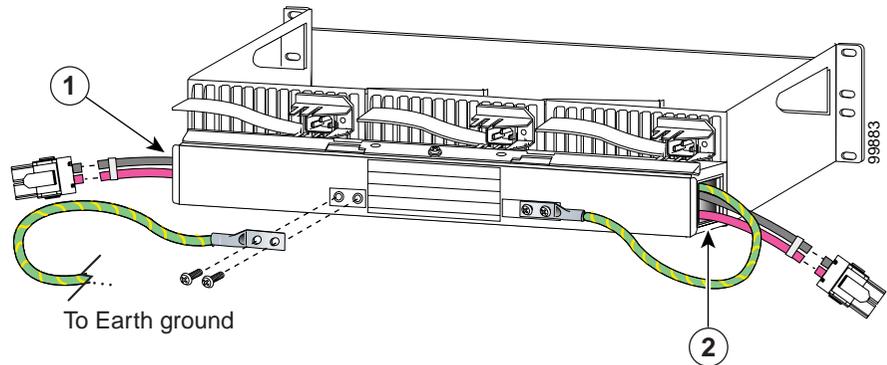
Connecting Cable Wires to the Terminal Blocks
